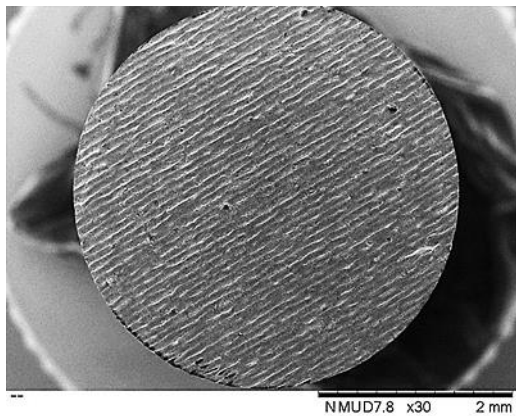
Fractured tensile bar. Machined from a cylinder produced by in-situ
